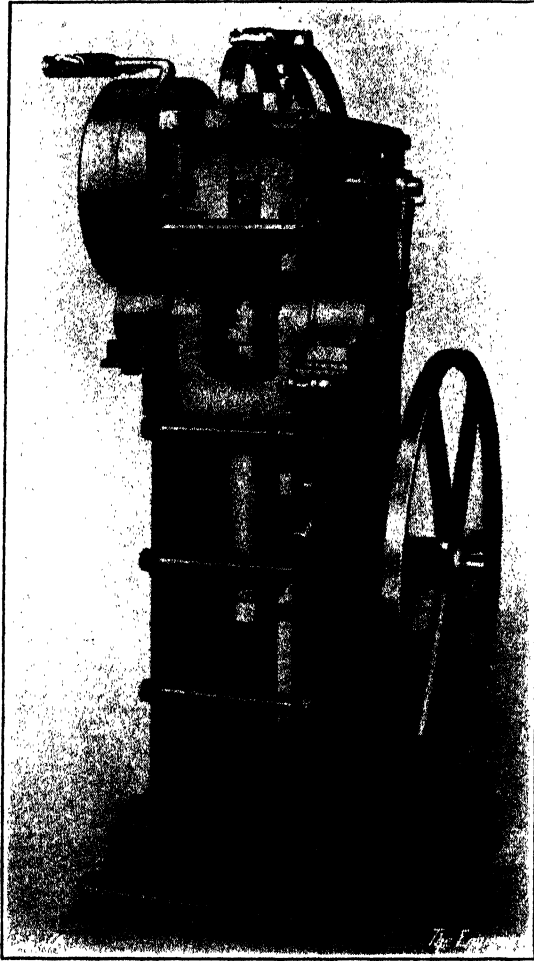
DIE-BATTERING MACHINE—G. CROSSLEY.
